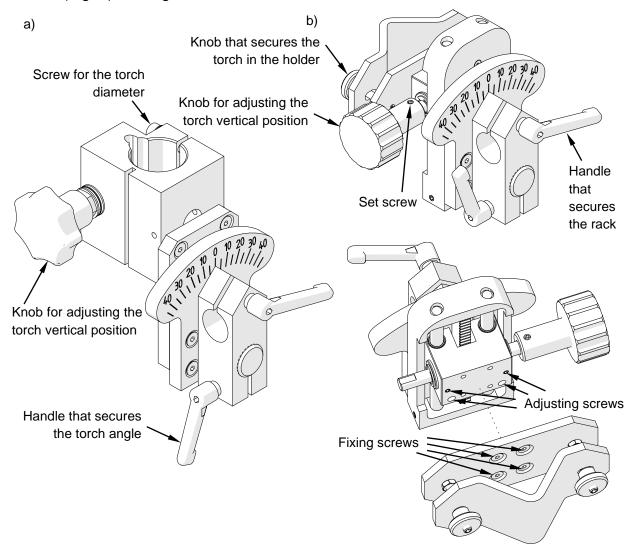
Design of the precise machine torch holder for oxy-fuel cutting (a) and of the precise torch holder for plasma cutting (b)
